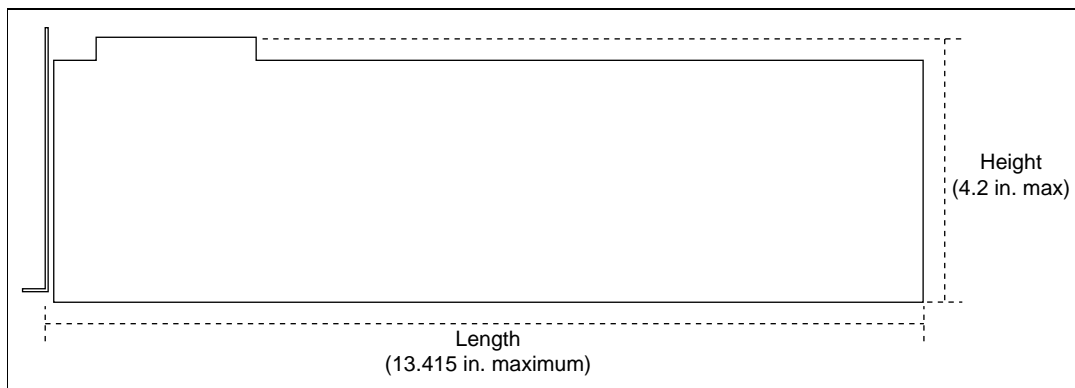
I/O Board Dimensions for VXIpc-872 Expansion Slot
